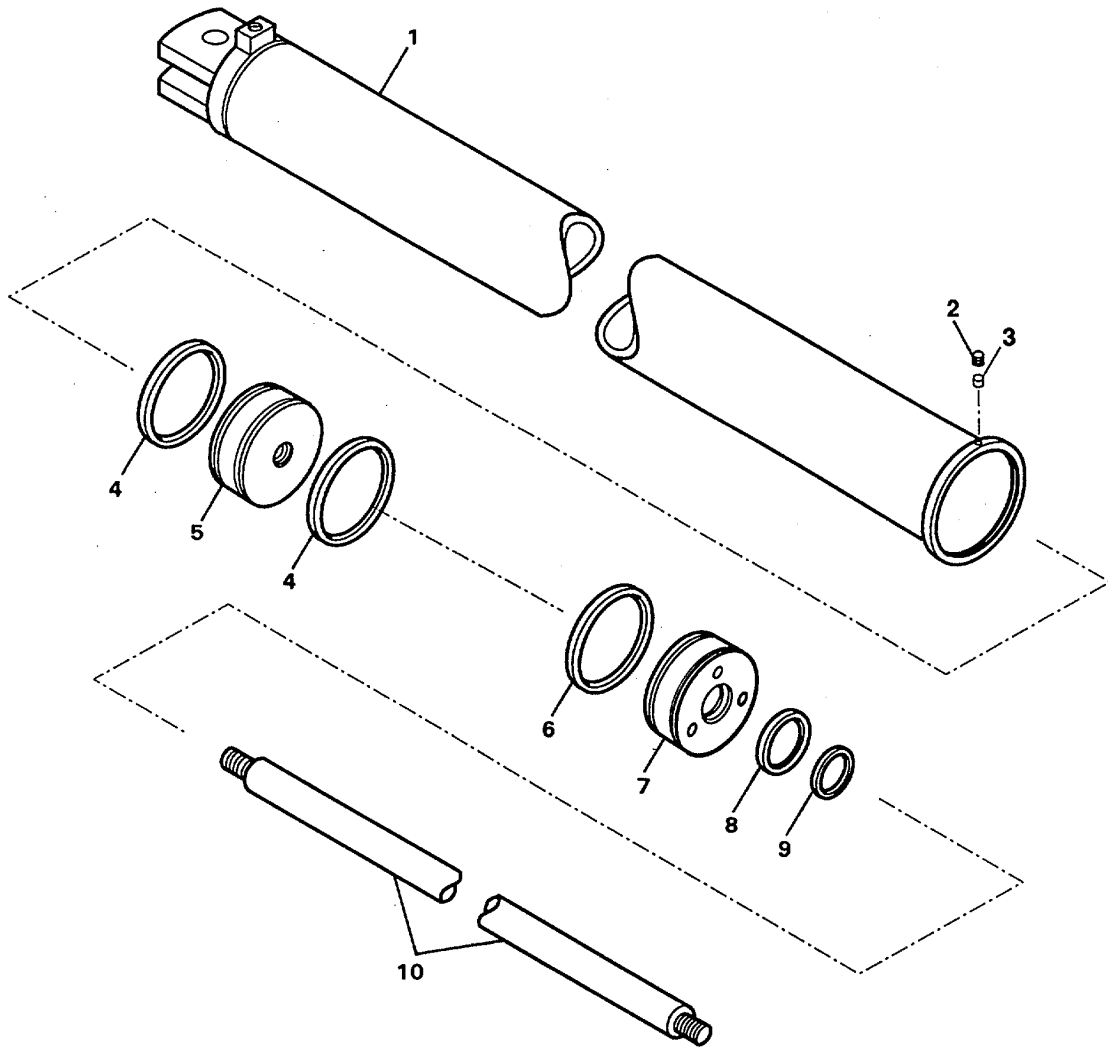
Ladder Extension Hydraulic Cylinder-Front
